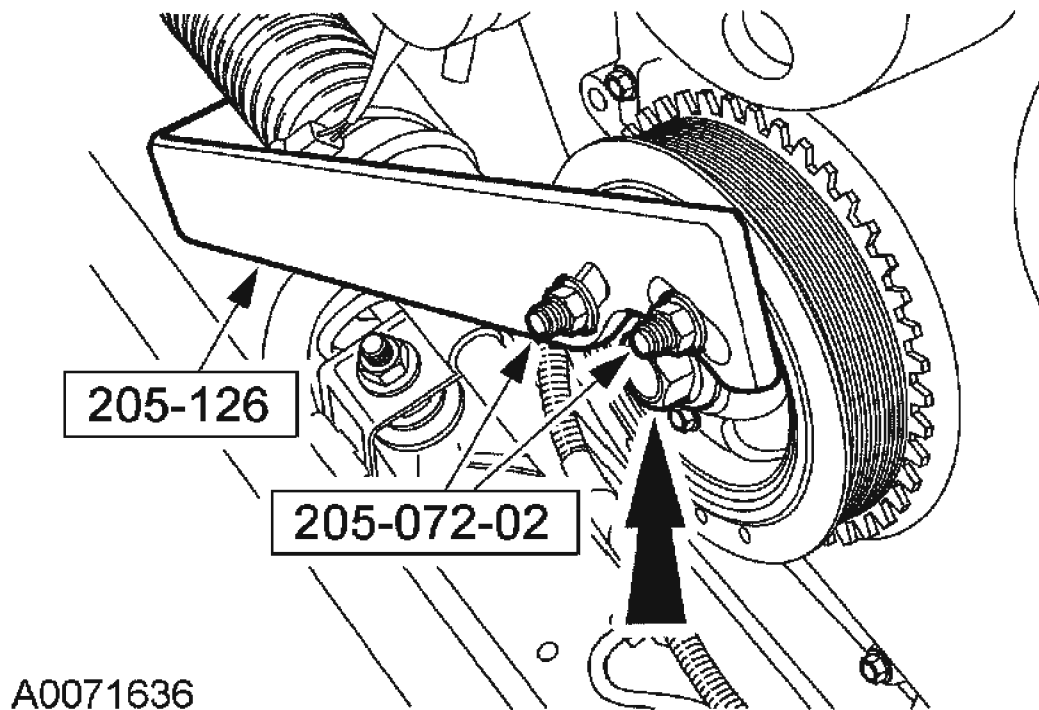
Using Special Tools To Hold Crankshaft Pulley In Place And Tighten Crankshaft Pulley Bolt
